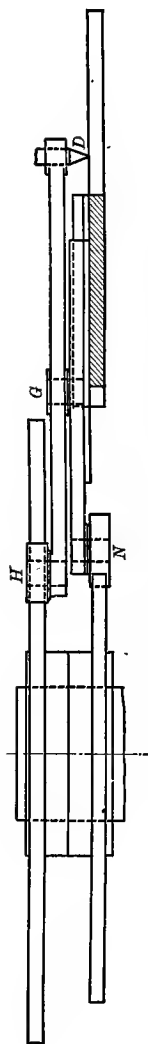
PROBLEM 19, FRONT VIEW OF CAM MECHANISM
